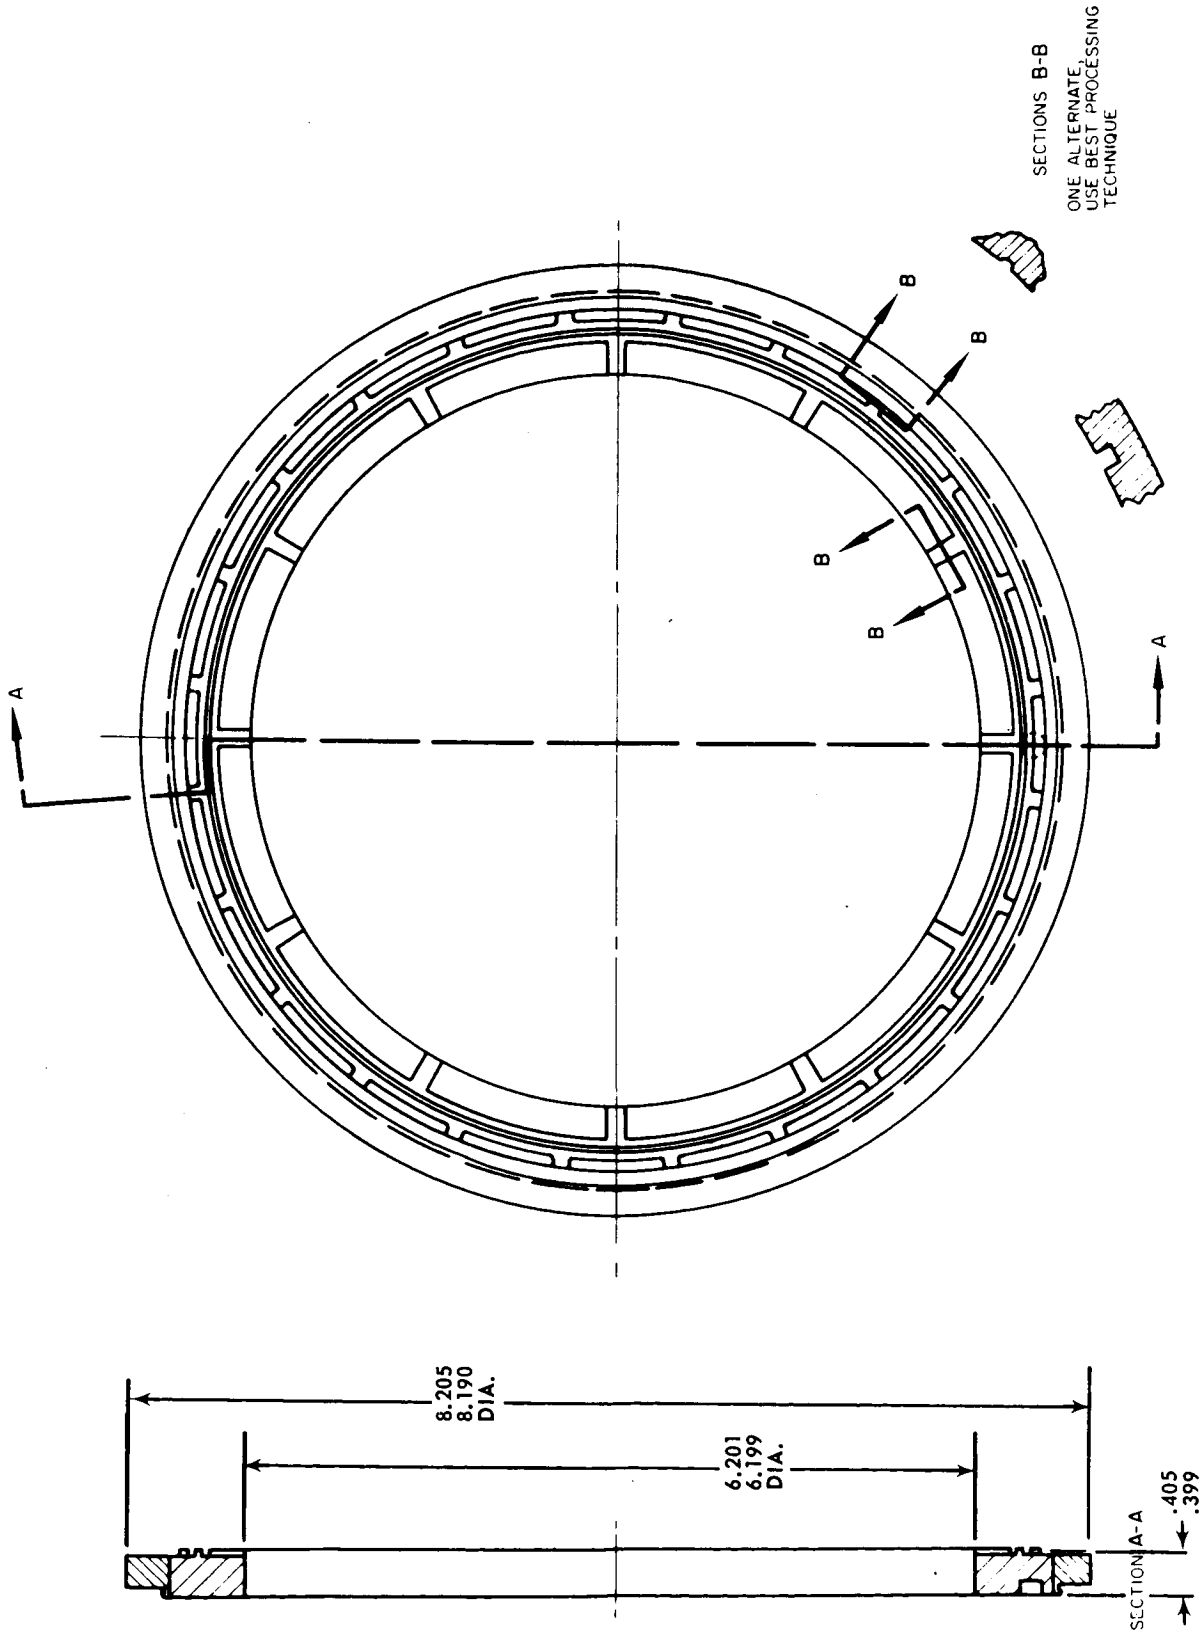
Carbon Seal Assembly For Face Contact Bellows Secondary Seal
